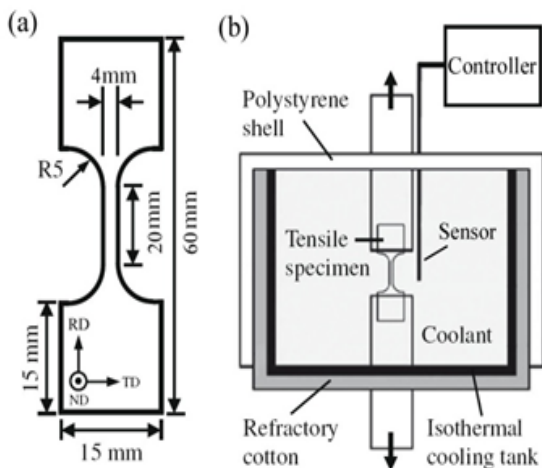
Schematic illustration of a) the tensile specimen dimension and b) the set-up of low temperature tensile test tank.
